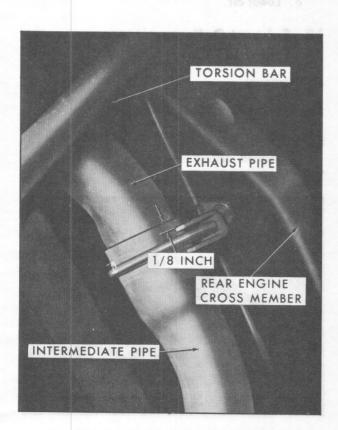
Exhaust Pipe at "Y" Pipe
